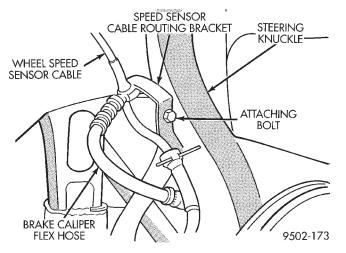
Wheel Speed Sensor Cable Routing Bracket
